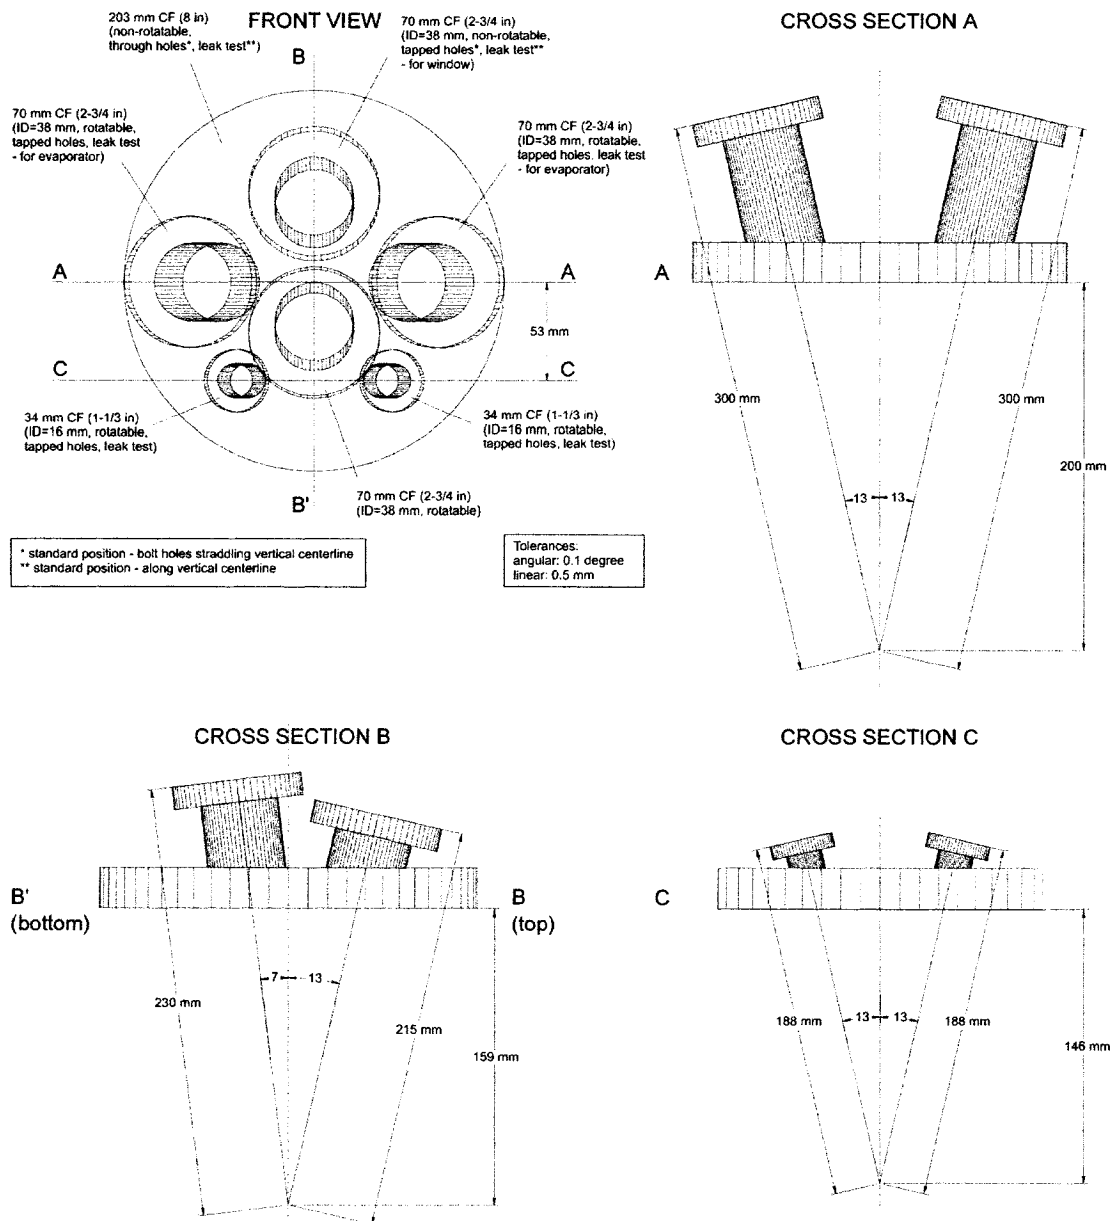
Schematic showing front and cross sectional views of the custom built evaporator port.
